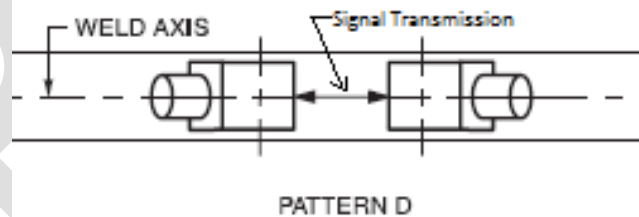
UT INSPECTION OF WELD SEAM - ON-BEAD PROBES
